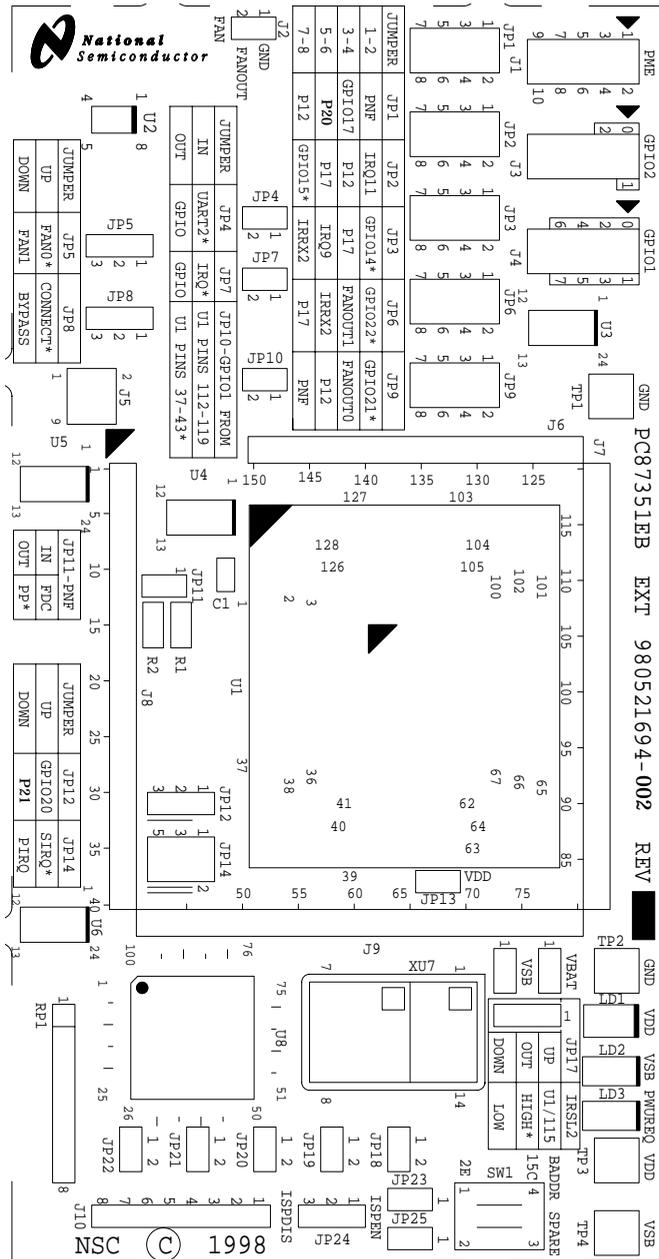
PC87351EB Extension Board Component-Side Layout
